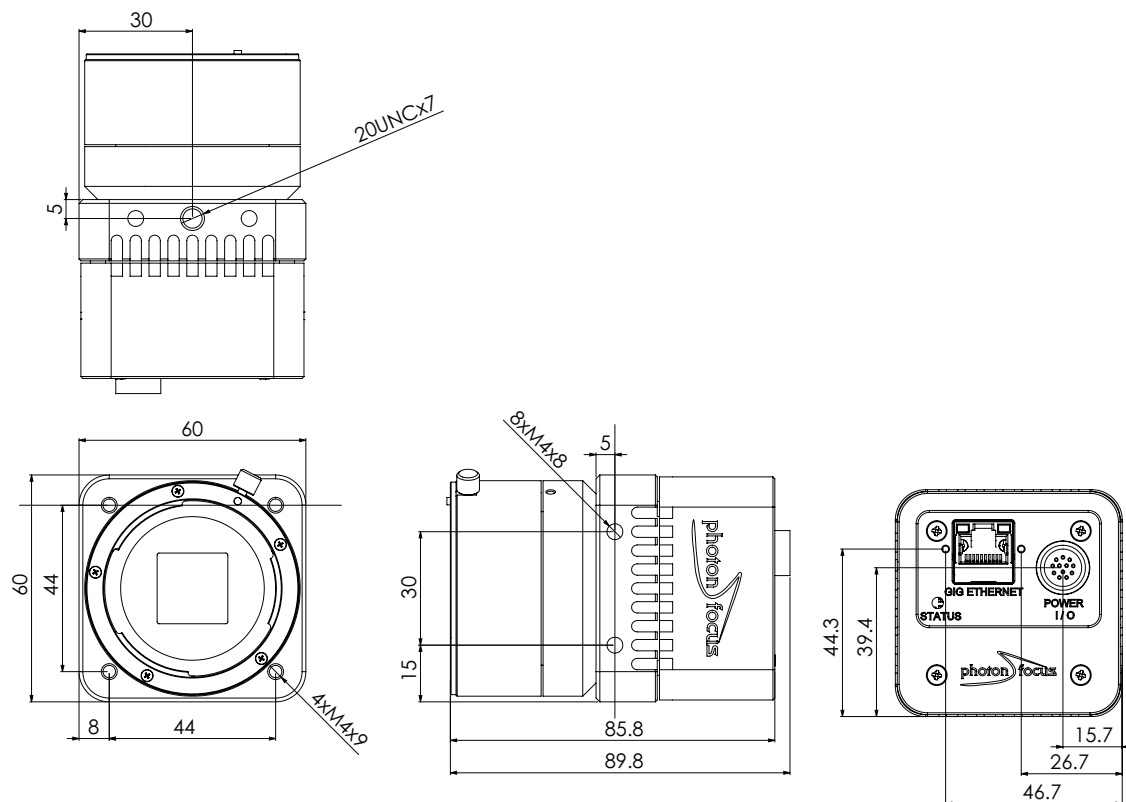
Mechanical dimensions of the MV1-D2080-G2 GigE camera with F-Mount adapter
